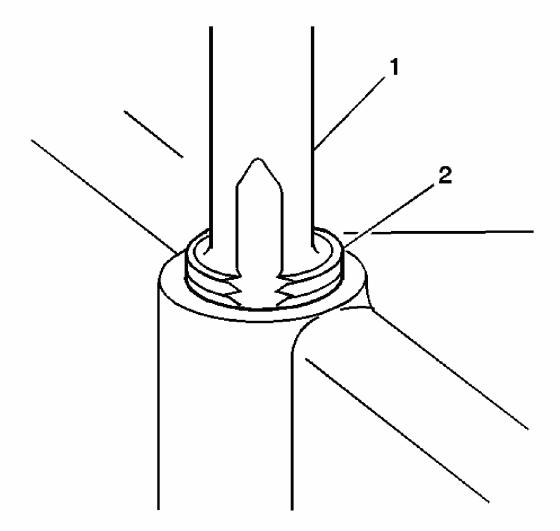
View Of Proper Tapping Distance - Tapered Thread Courtesy of GENERAL MOTORS CORP.
